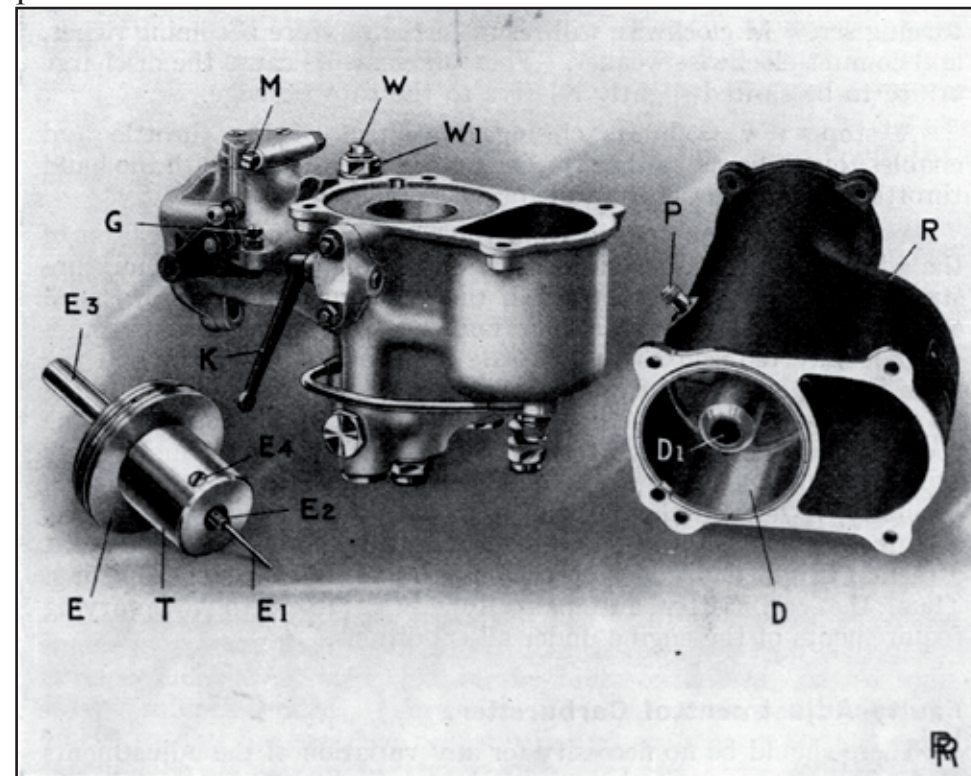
CARBURETTER, WITH CERTAIN PARTS DISMANTLED.
